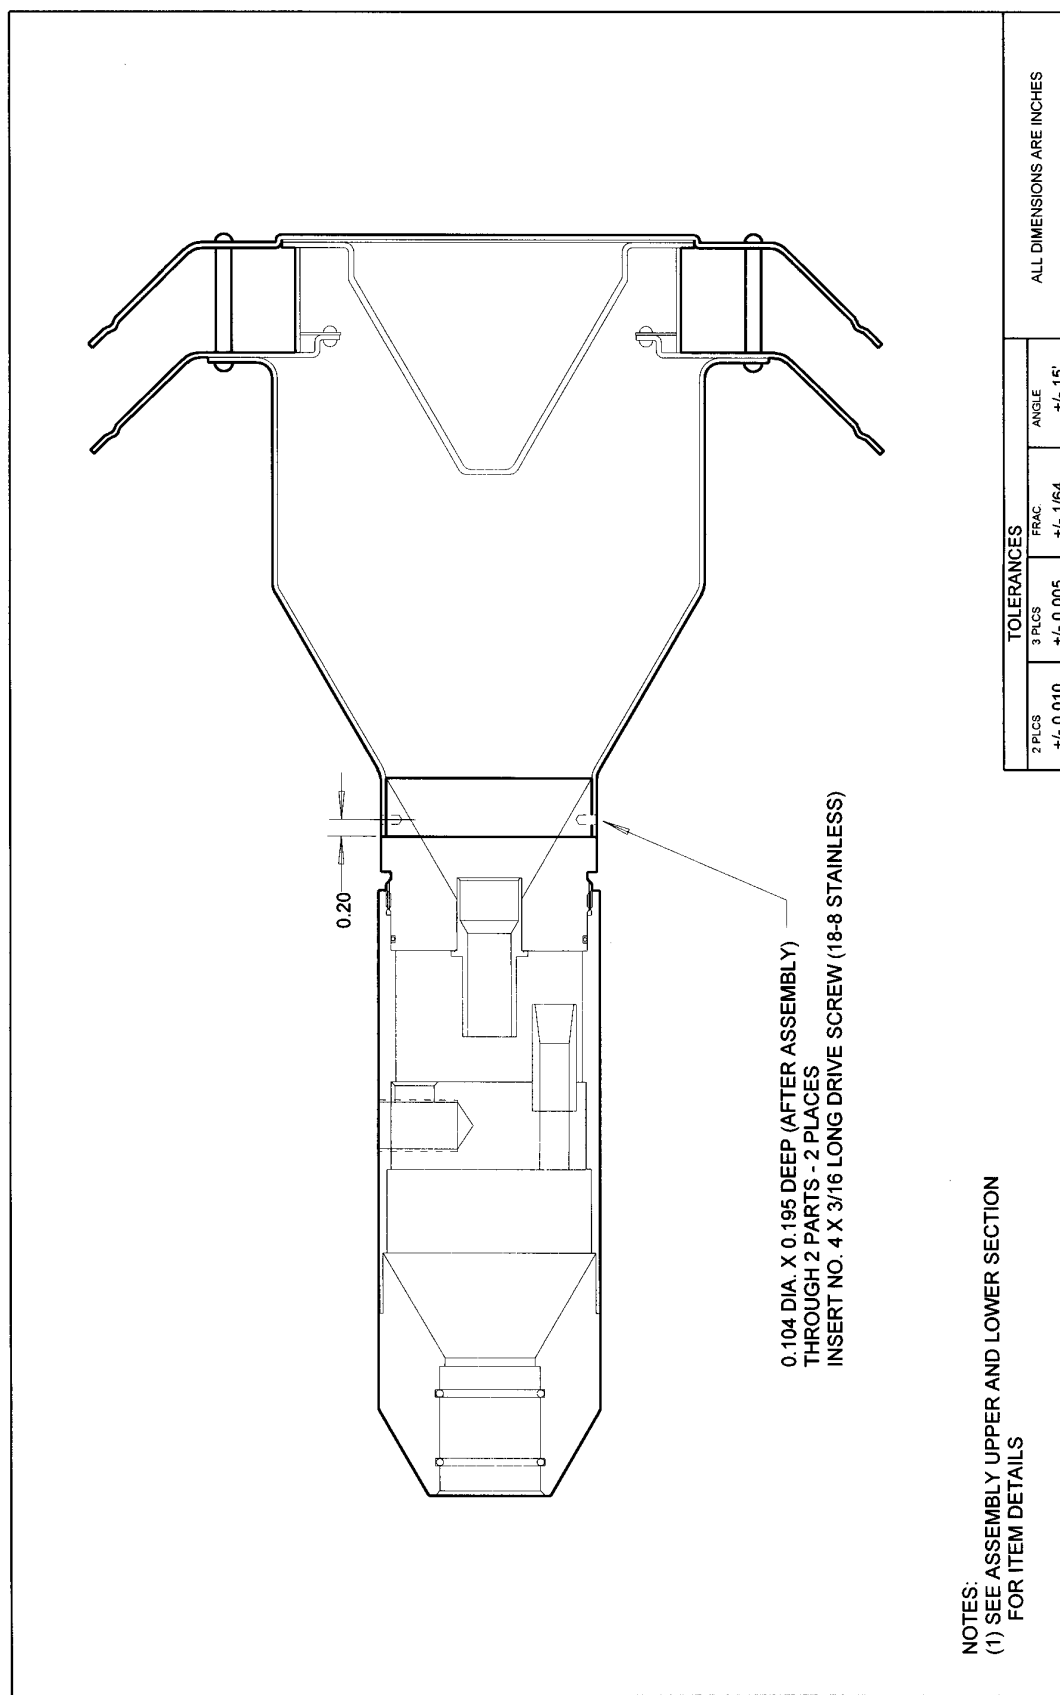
10-MICRON ASSEMBLY, UPPER SECTION
